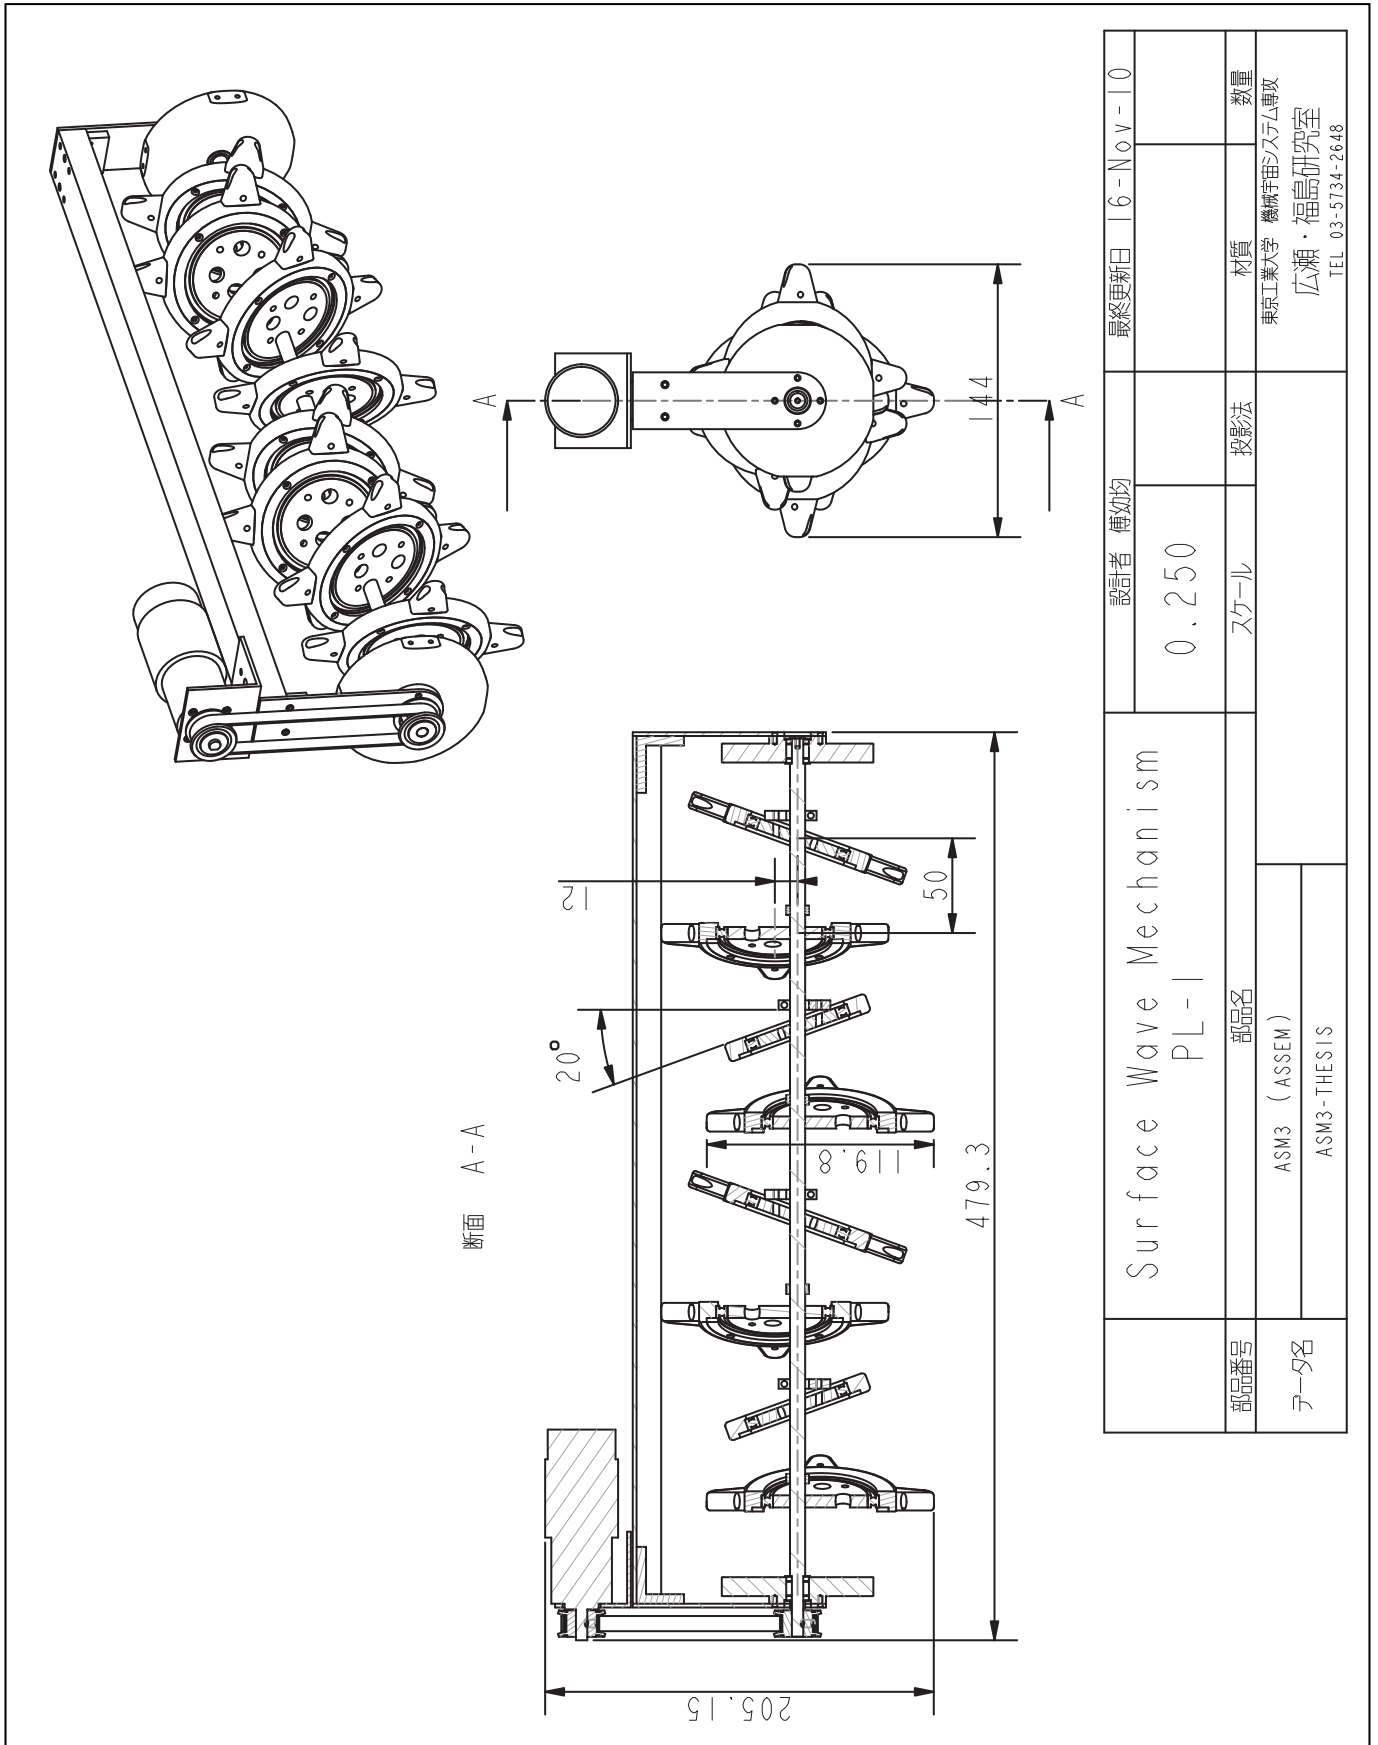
Drawing of Surface Wave Mechanism PL-I
